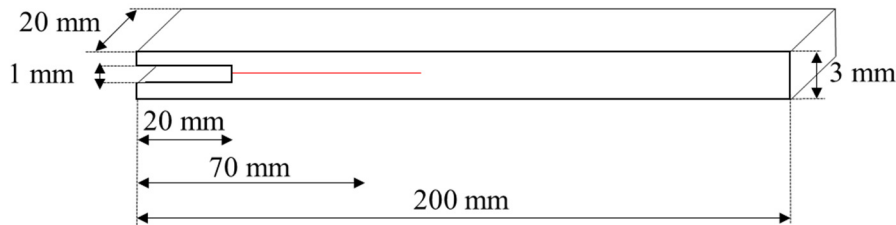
DCB and MMB specimen dimension with hinge cap groove and separation layer (red).
